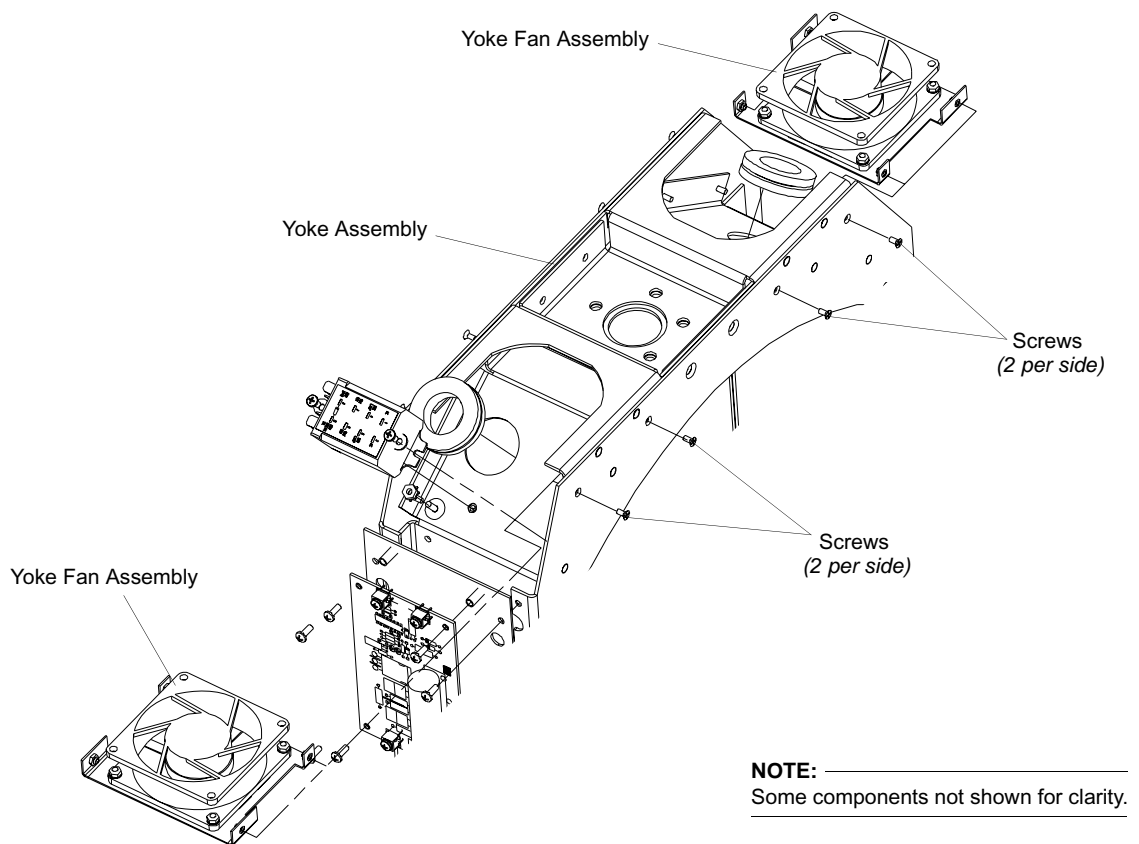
VL3000 Yoke Fan Assembly Replacement
